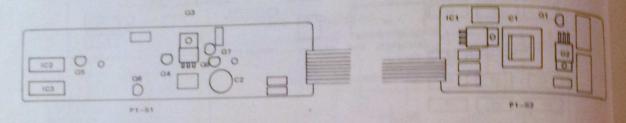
POWER SUPPLY CIRCUIT BOARDS
